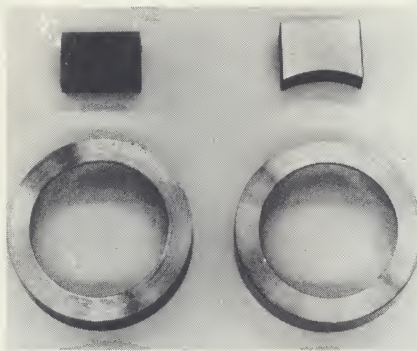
Typical corrosion test specimens are aluminum-bronze rotating rings and stationary blocks made of 4130 low alloy chrome steel. Rings simulate bushings; journal blocks represent fixed pins or shafts. Conforming steel block (right) is used for full surface contact at lower load levels.
